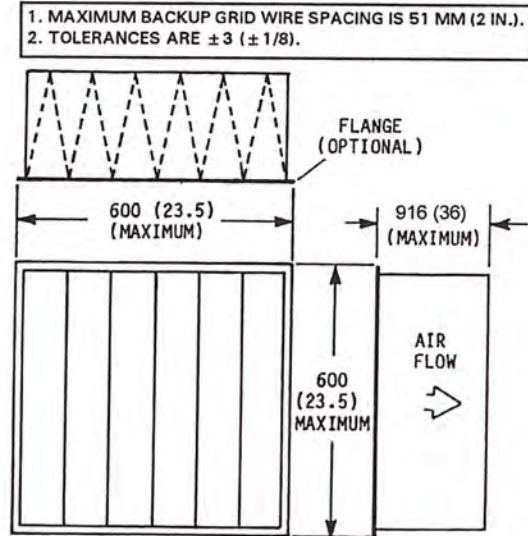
Final filter: cartridge form. Dimensions are in mm (in.).
